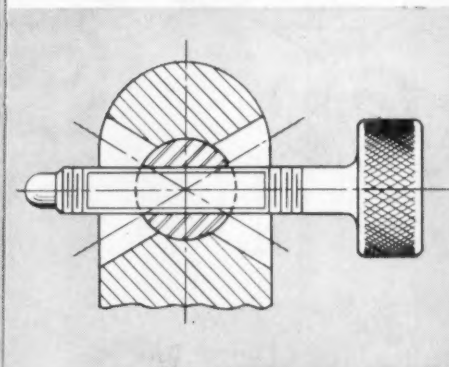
Type of swinging clamp in which a straight designed pin of single diameter is employed as the pivoting member.
